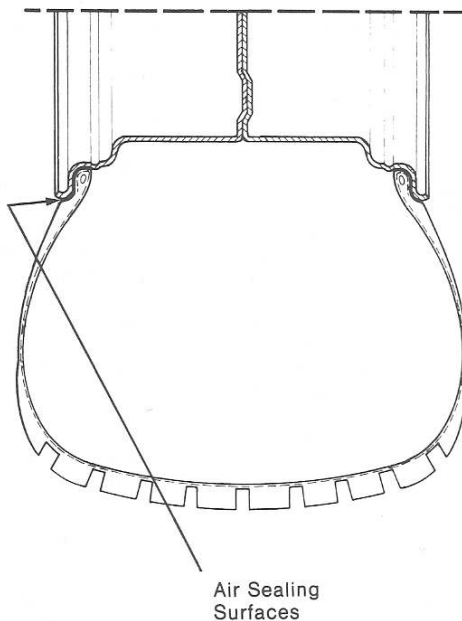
Air sealing surfaces of tire bead and rim flange (Sec 8)
